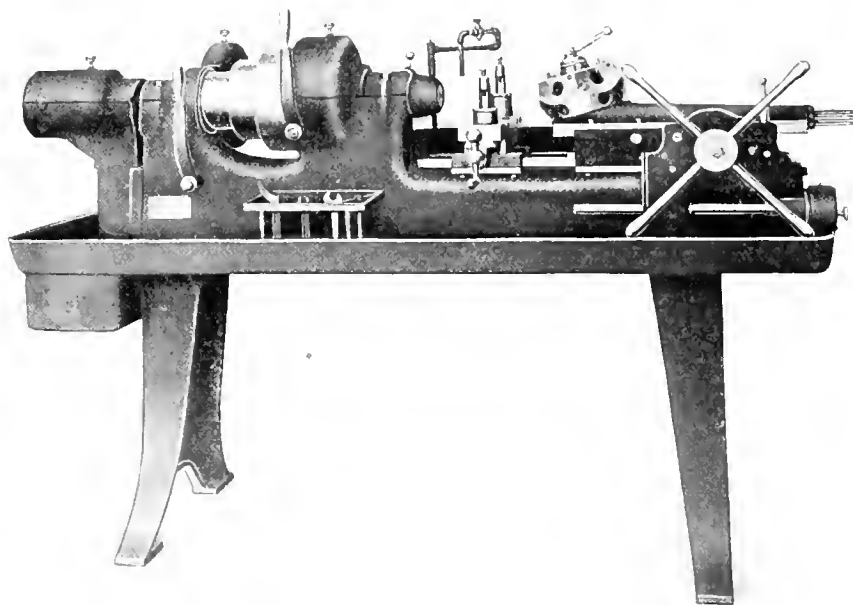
Wood Tilted-turret Screw Machine with Friction Geared Head and Geared Automatic Feed to the Turret Slide
